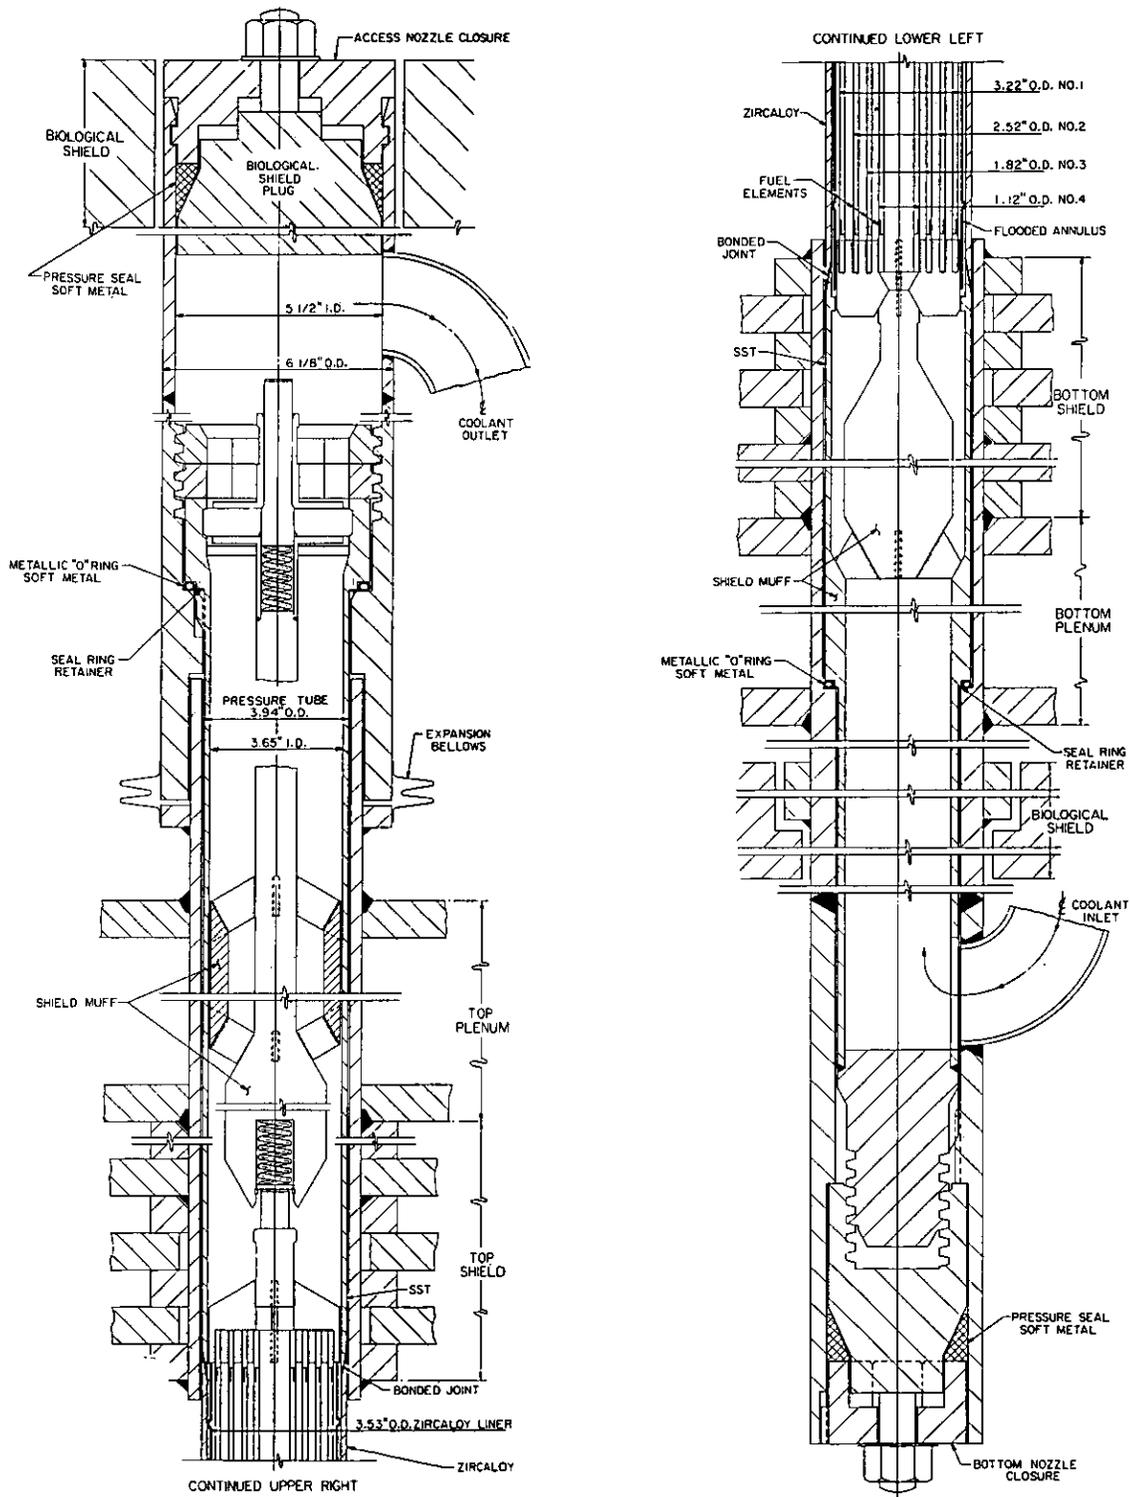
FUEL AND HOUSING TUBE ASSEMBLY FOR BOILING D₂O REACTOR
